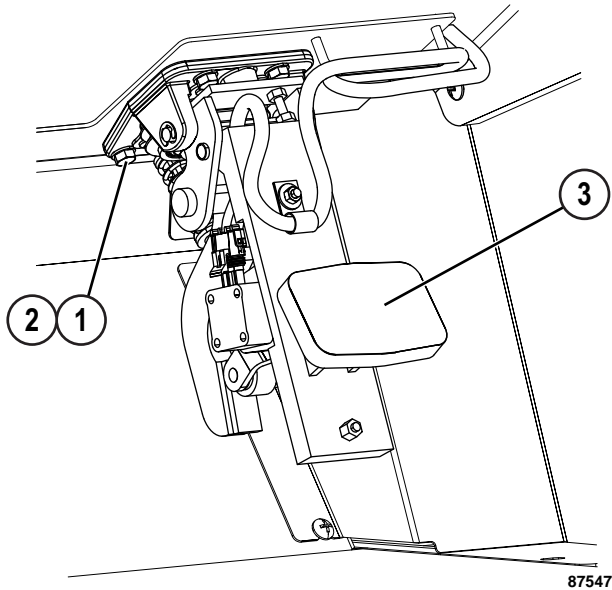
BRAKE VALVE REMOVAL & INSTALLATION
